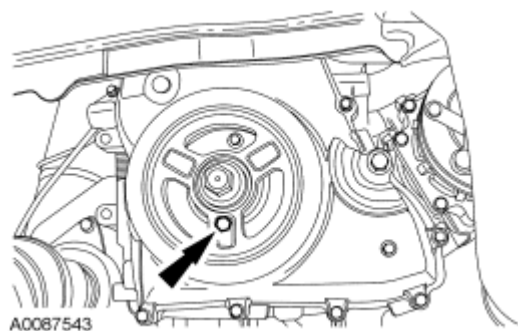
Aligning Crankshaft Pulley Bolt Holes
